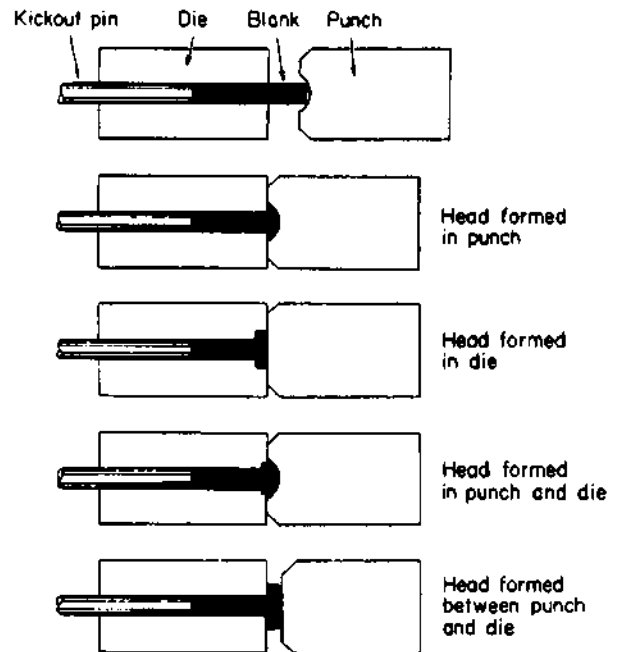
I2 Cold heading. Upsetting the end of the workpiece material can be achieved by a moving punch, in the stationary die, or in both punch and die and between the punch and the die. (Courtesy National Machinery Company)
